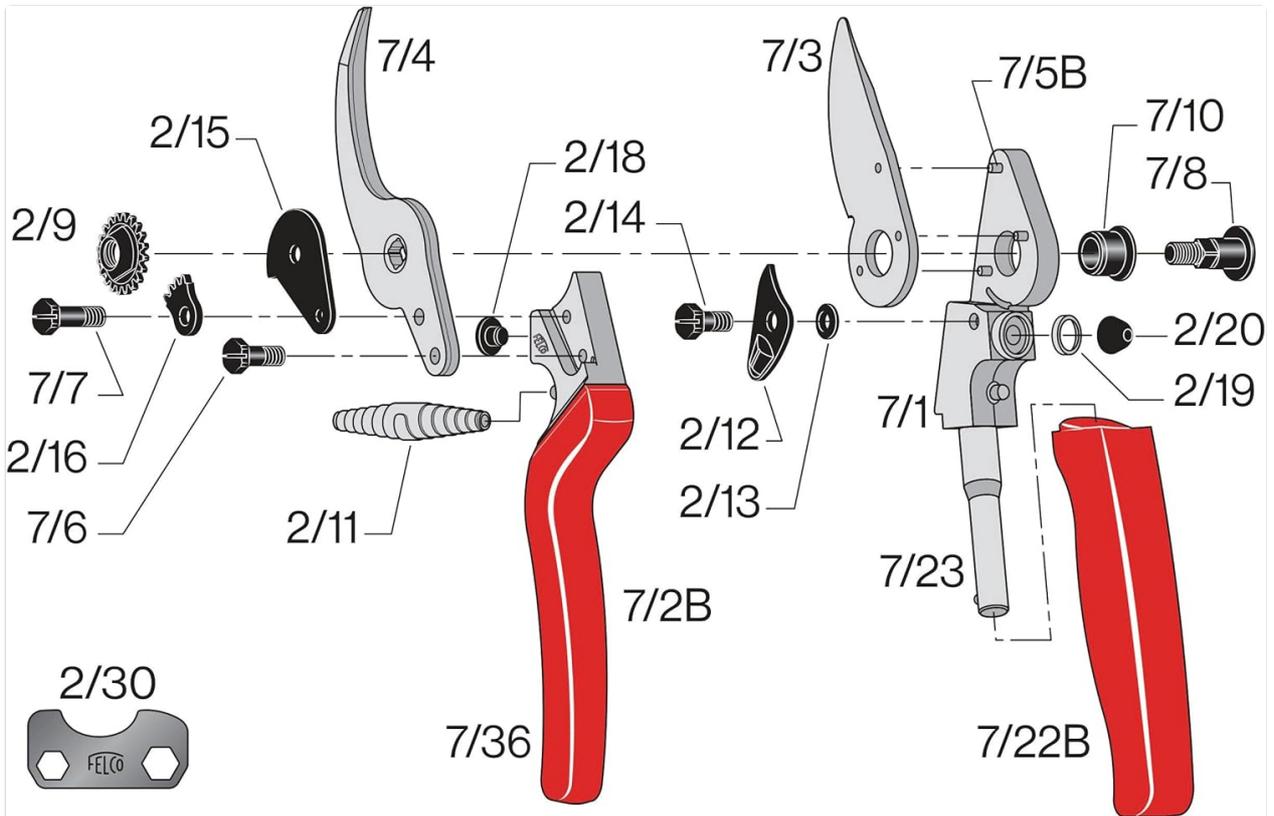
Exploded view of FELCO F7 components, useful for maintenance and part replacement.
